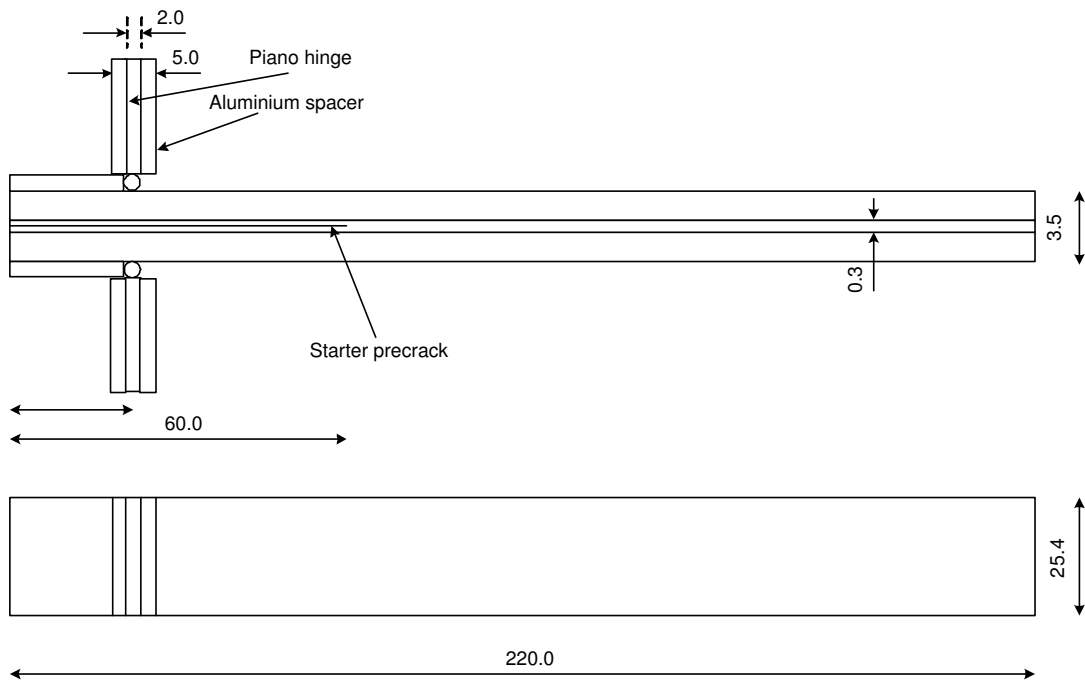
A schematic diagram of the double cantilever beam (DCB) test specimen with aluminium spacer bonded to piano hinges.
